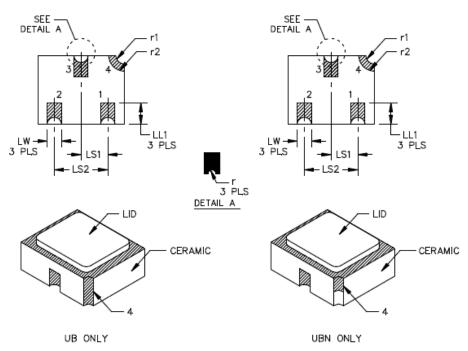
Physical dimensions, surface mount 2N3634UB through 2N3637UB (UB and UBN version).
